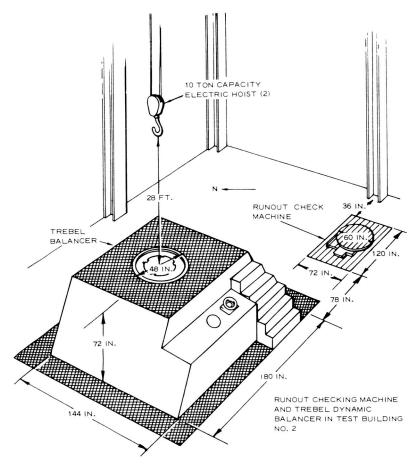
TEST BUILDING NO. 2 - BALANCING EQUIPMENT - WFC
